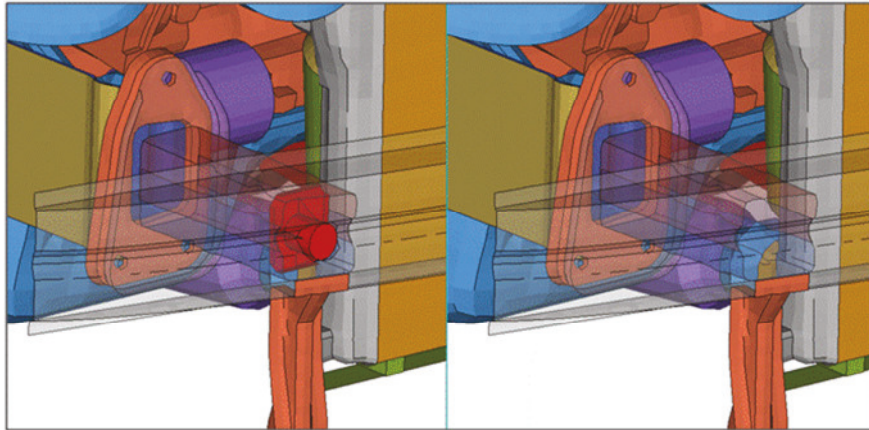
GCM1A – Right front crash box with (left figure) and without (right figure) screw thread attachment.
